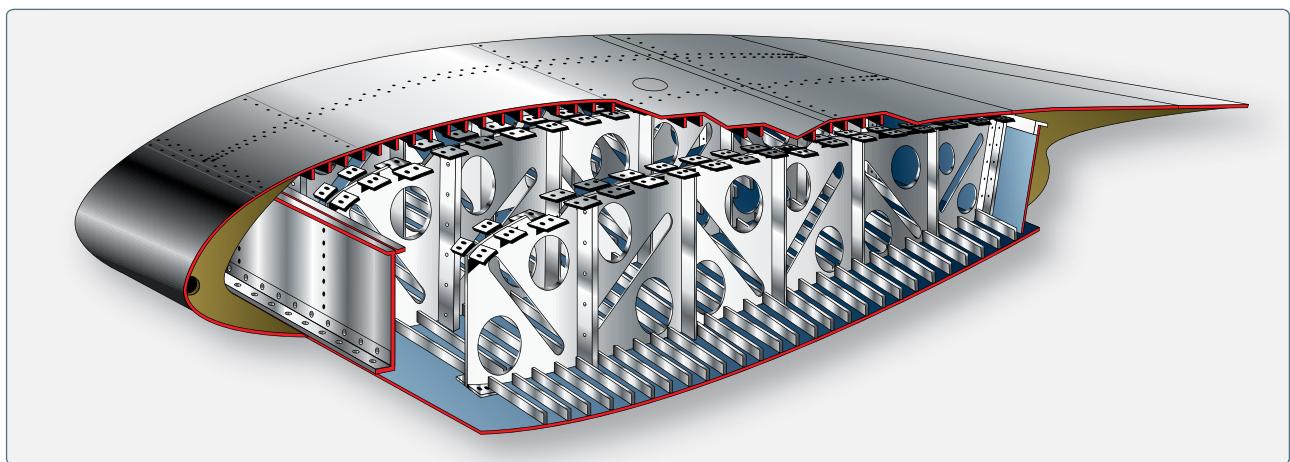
The skin is an integral load carrying part of a stressed skin design.
